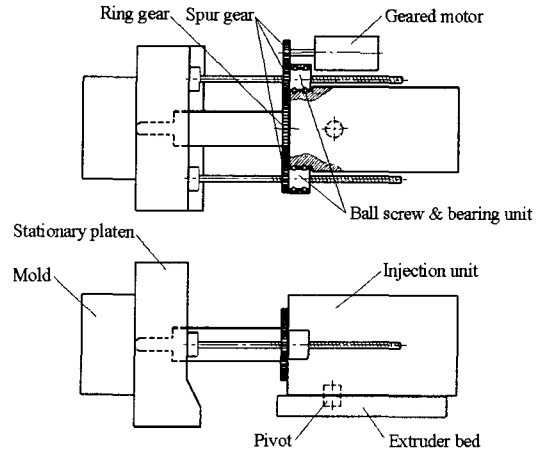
Existing nozzle contact mechanism preventing stationary platen bending
